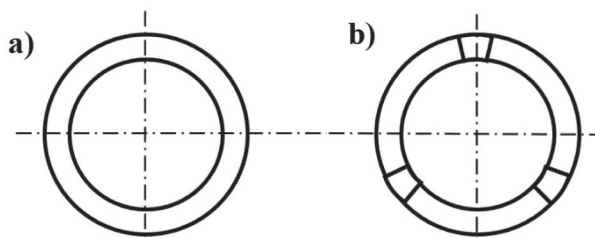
The friction surfaces of specimens: a) the ring friction surfaces of the upper, revolving specimen 2, b) Three segments of the friction surface of the bottom, non-revolving specimen 1 [L. 9, 10]
